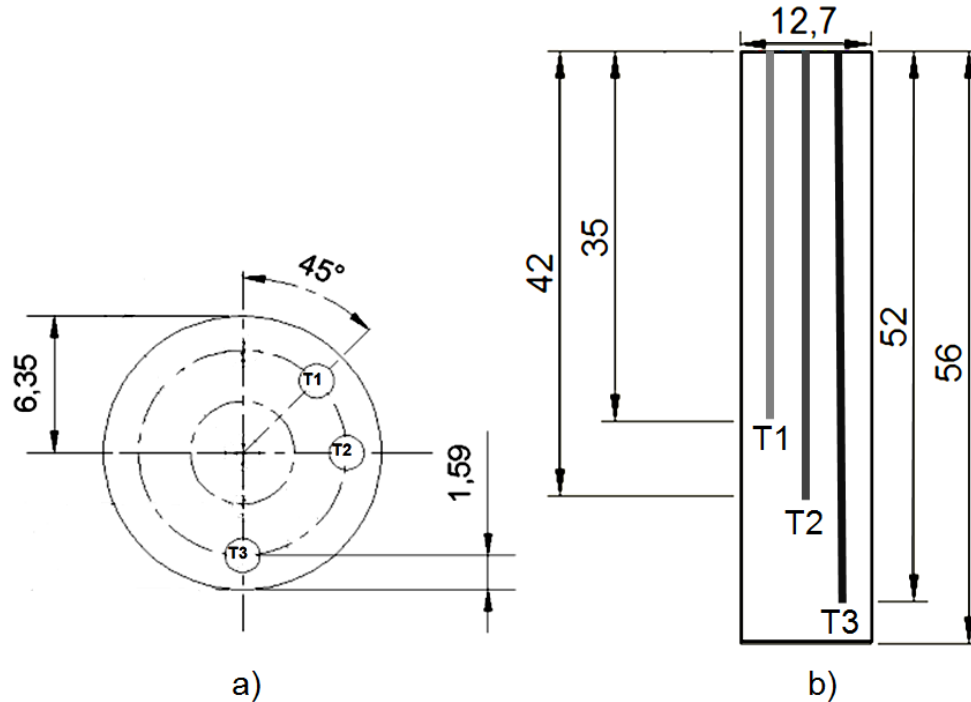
Axial and radial position of the thermocouples within probe (distances in millimeters): a) top view, b) side view.
